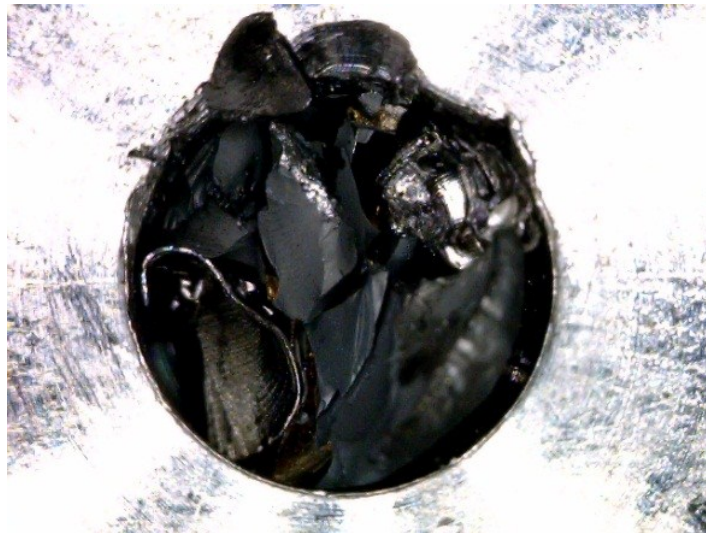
Hole situation after the tool damage (PCD-GDN)
